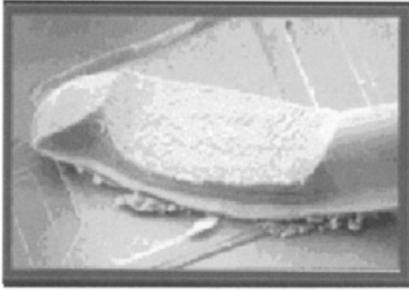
Wedge bond formed with straight back radius [Courtesy: Gaiser Tool]
